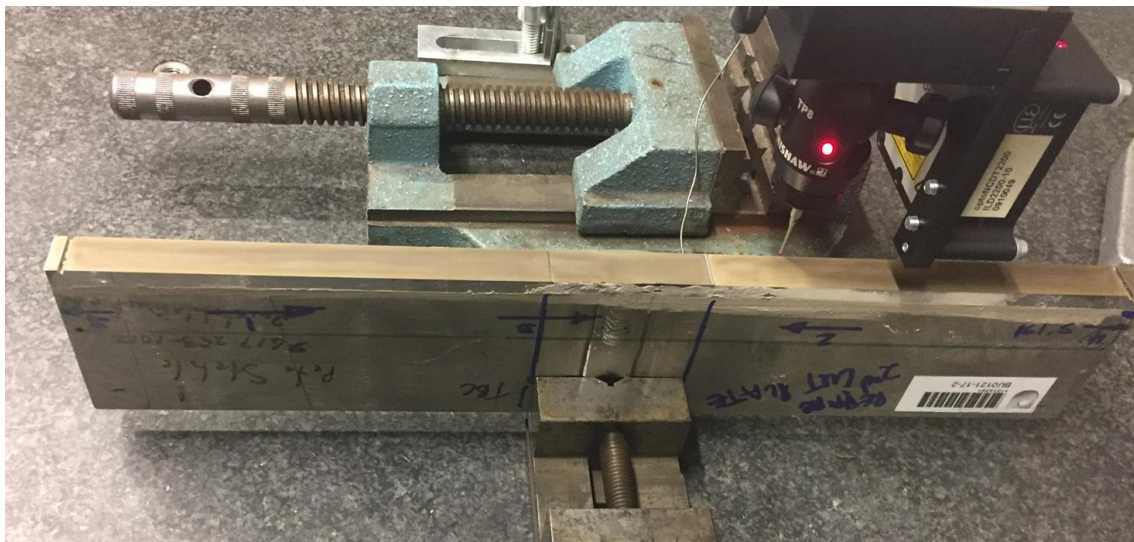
Picture showing surface measurements using a laser hybrid CMM.
